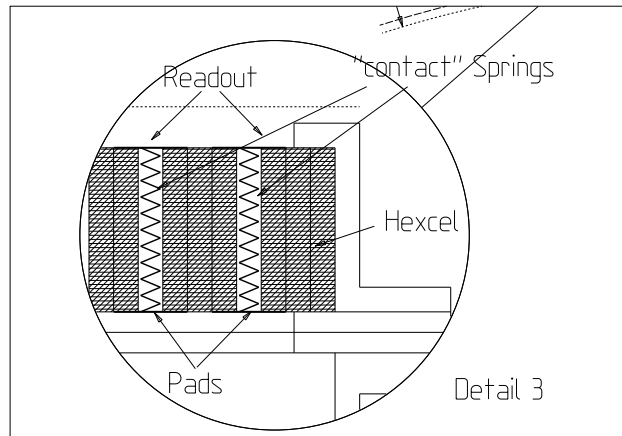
Cut through the backplane of the readout chamber showing the electrical contact between the two backings (pad plane and PCB) of the honeycomb material.
